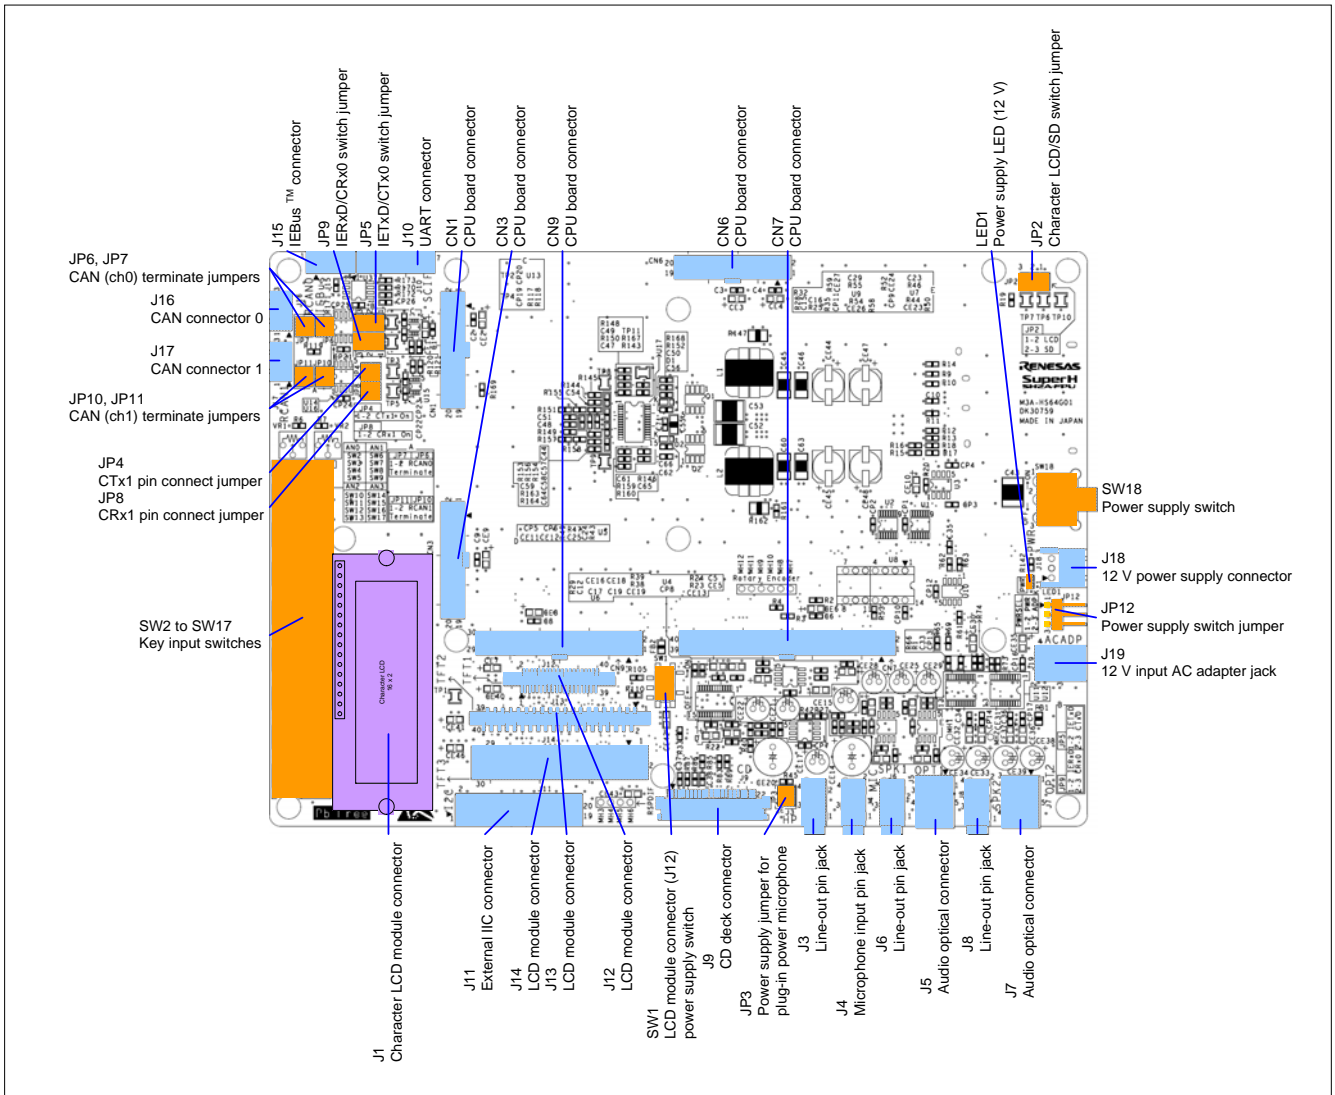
M3A-HS64G01 Layout and Component Placement (Top View of the Component Side)
